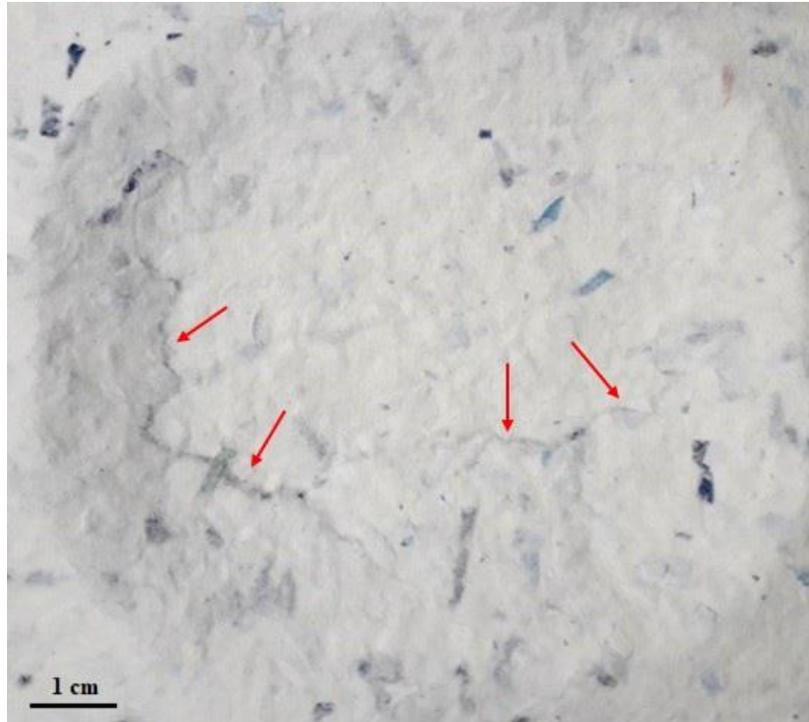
Defects in bottom region of a molded pulp sample, the defects are highlighted with arrows
